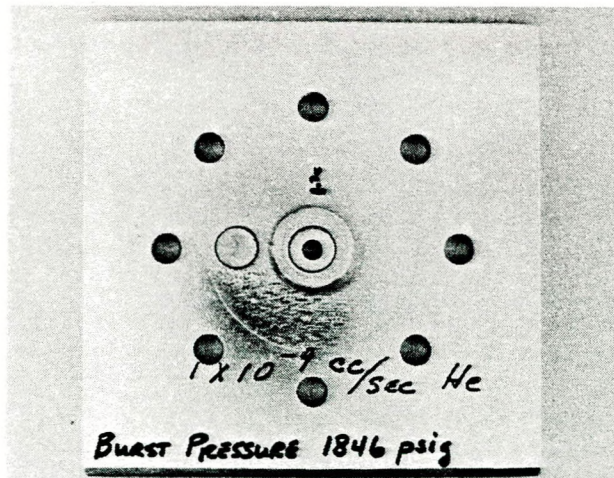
4047 to A356 Pressure Test Plate Welds After Pressure Testing
